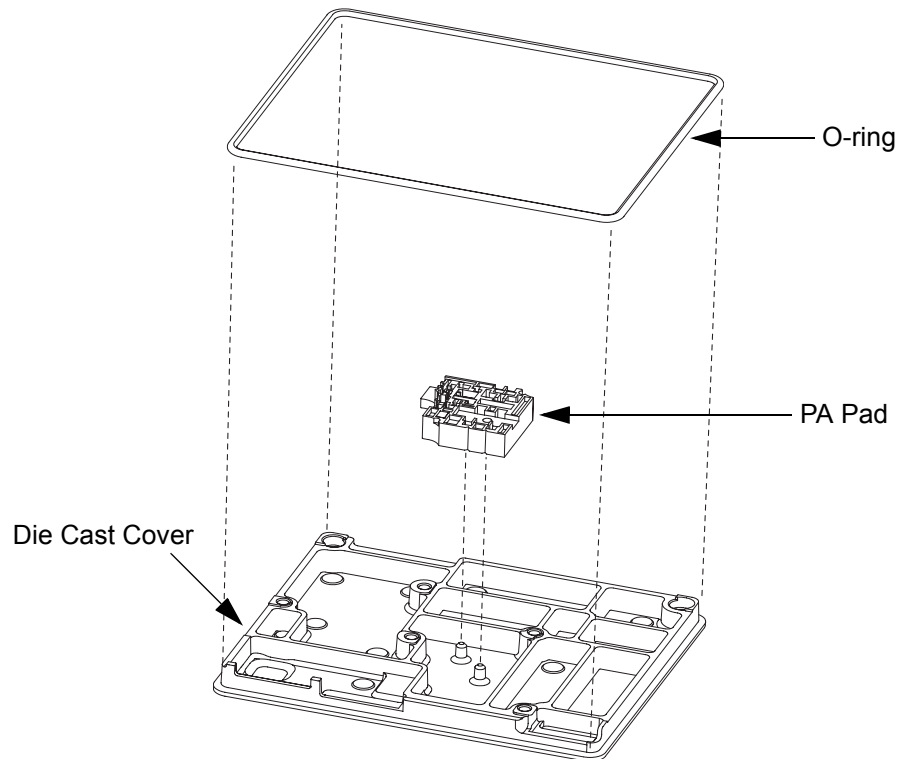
Assembling of PA Pad and O-ring (UHF models)
